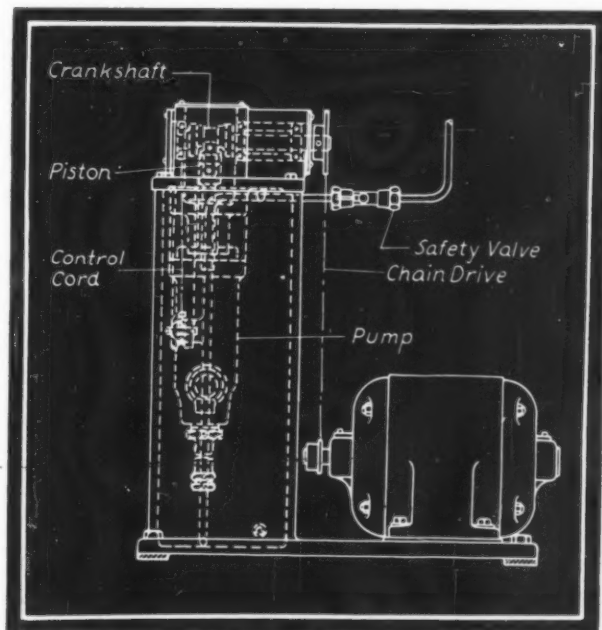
Pump is mounted in an inverted position on the under side of the cover plate
